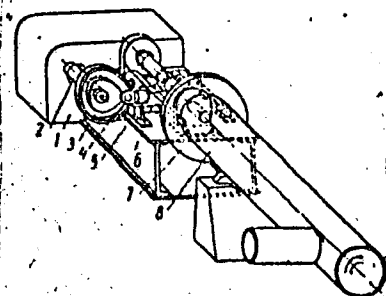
Welding manipulator. 1 - rotational device; 2 - driven shaft; 3 - duplicator; 4 - roll; 5 - rack; 6 - gear; 7 - face plate; 8 - joint to be welded.
